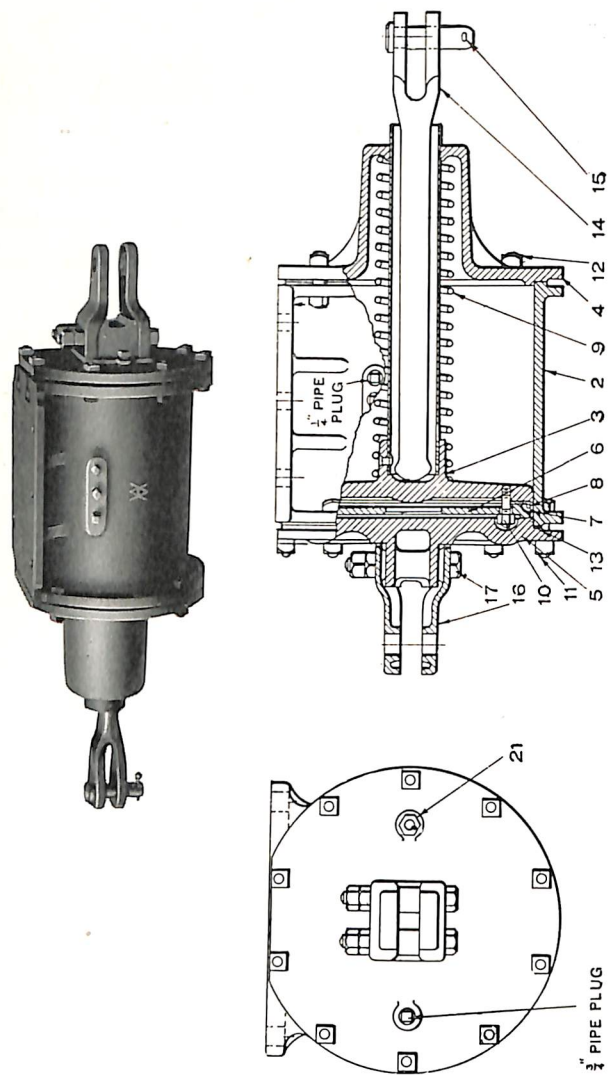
Type S Brake Cylinder, Exterior and Sectional Views
